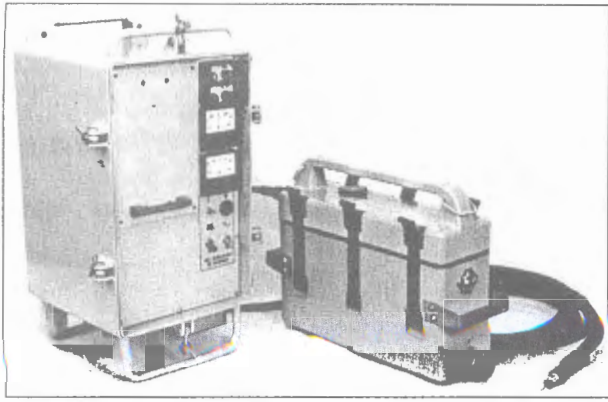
Semi-automatic machine PSh141 for underwater welding
